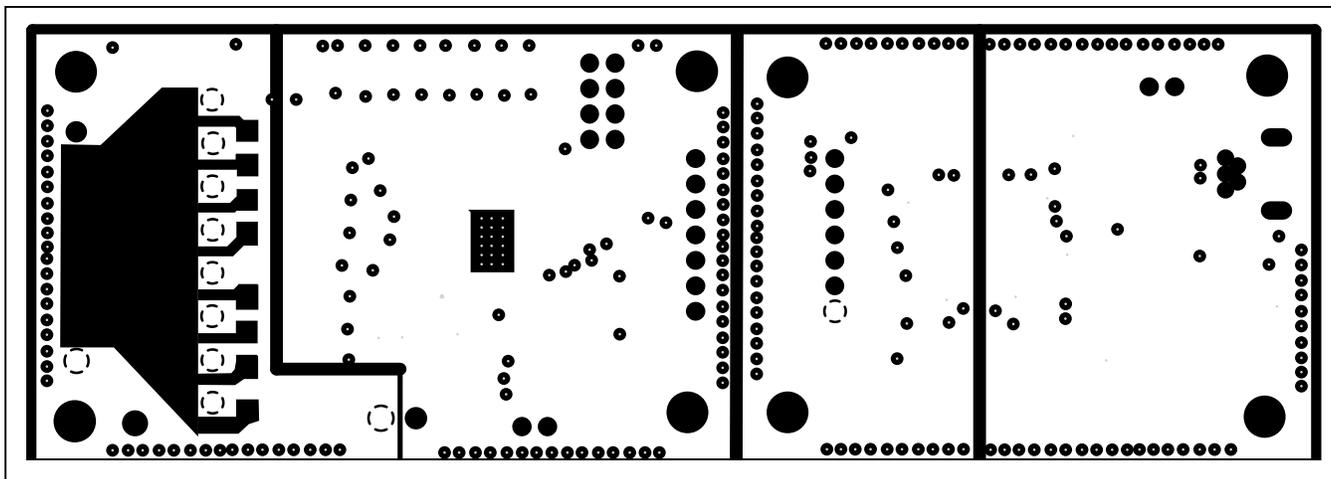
MAX31912/MAX31913 EV Kit PCB Layout—Internal Layer 2
